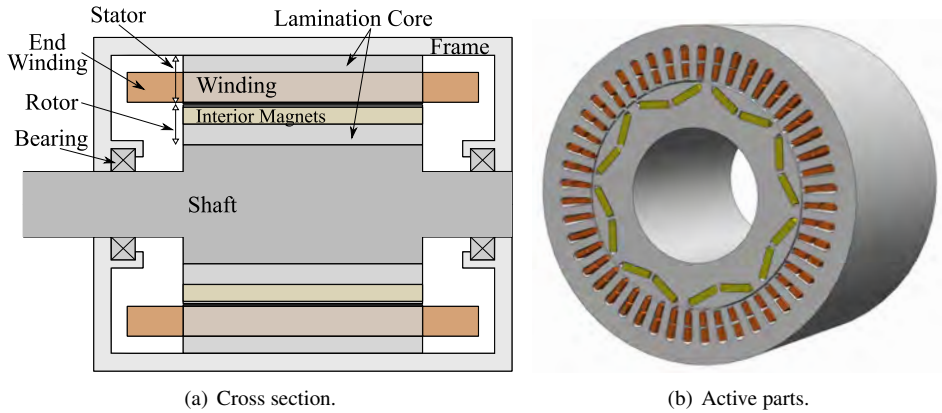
Axial cross section of machine configuration, and the active machine parts, of V-shaped reference motors.
